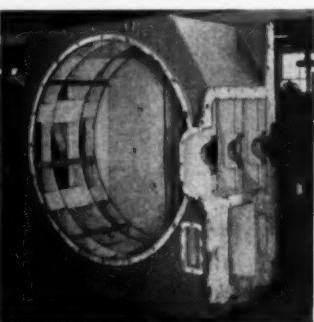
Welded blower housing required assembling and handling of 124 pieces, plus expensive machining.
